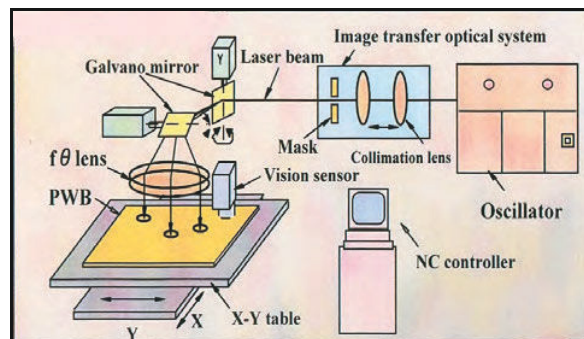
Configuration of CO₂ laser drilling machine (Mitsubishi ML605GTX II-5100U)
